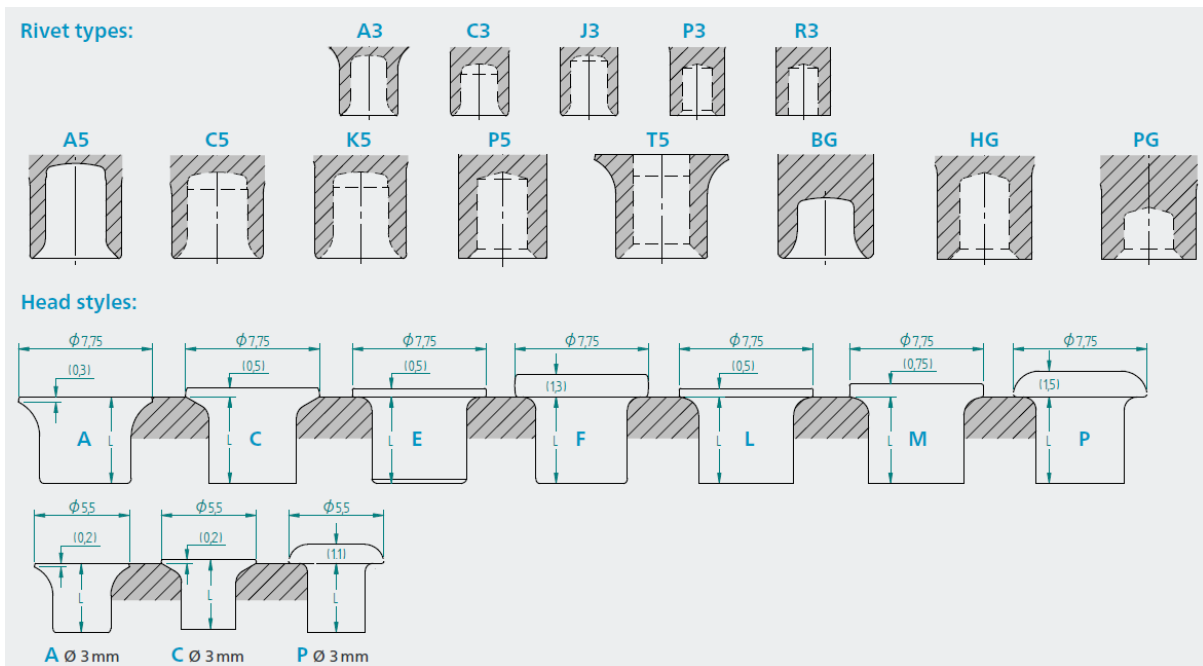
, Diagram showing the standard Figure 23 rivet types and head styles. (Atlas Copco Rivet Brochure 2019)
